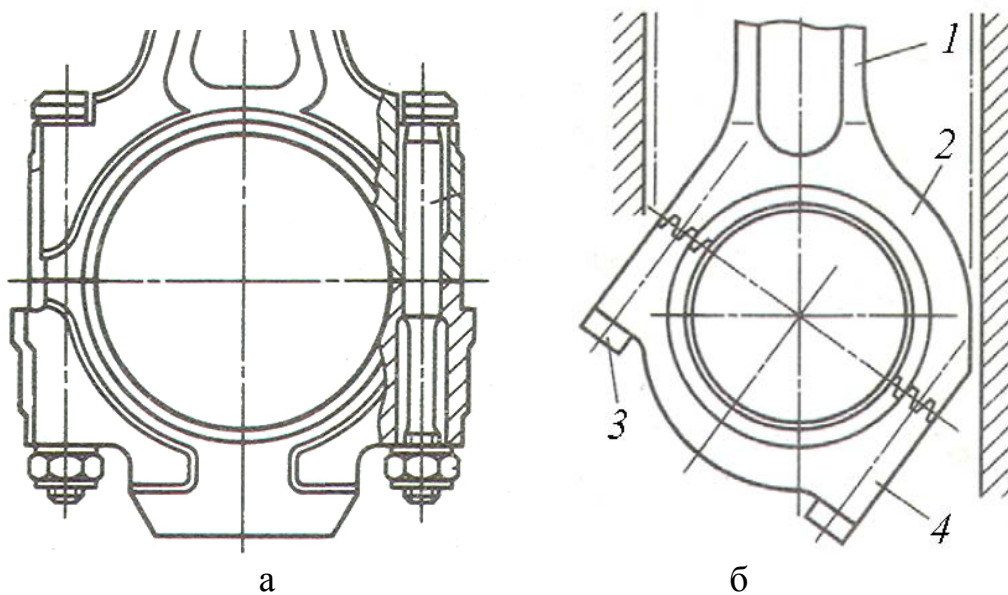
Connector types of the lower head of the connecting rod:
